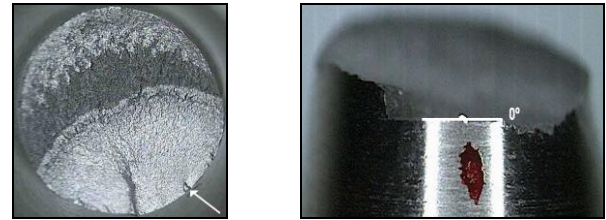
Fractographic analysis of the fatigue failure plane orientation under LB loading path shown in Table 3.
